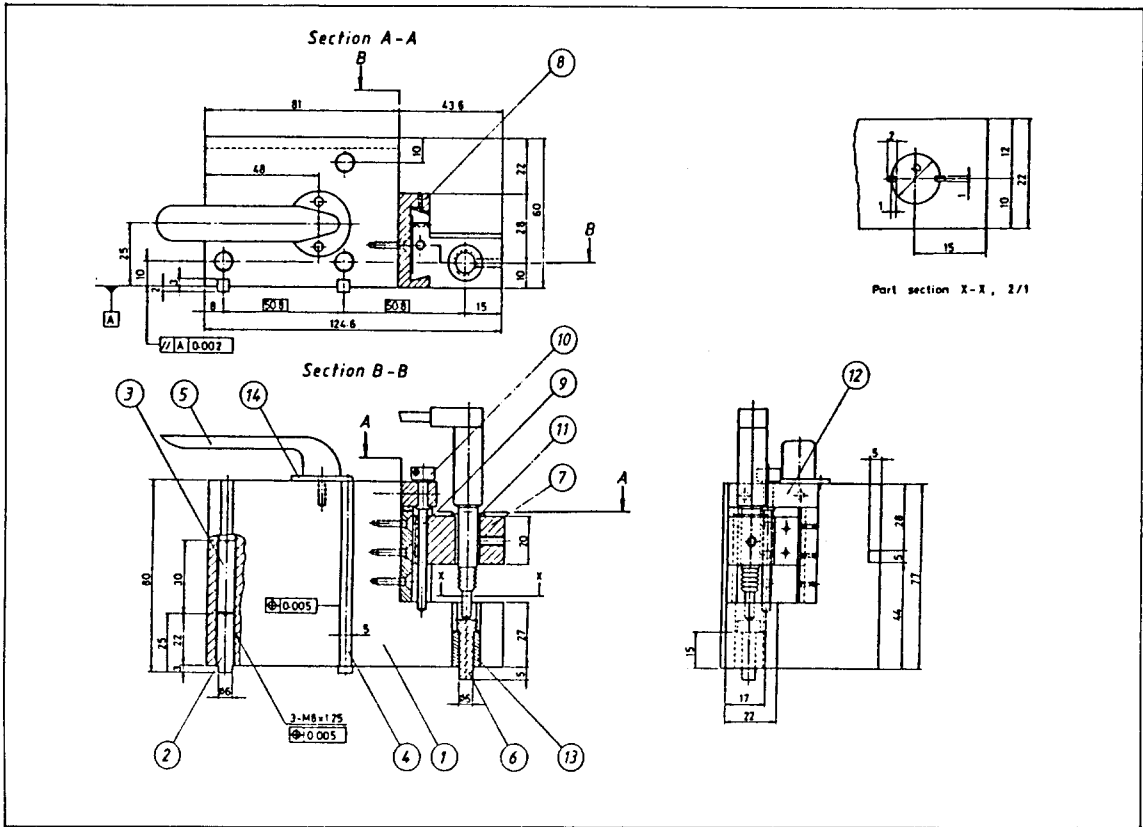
Assembly drawing of flatness measuring tool with Electronic Micrometer
